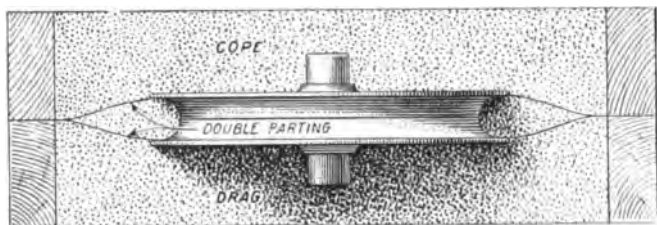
Casting a Sheave Wheel by a Double Sand Parting.
